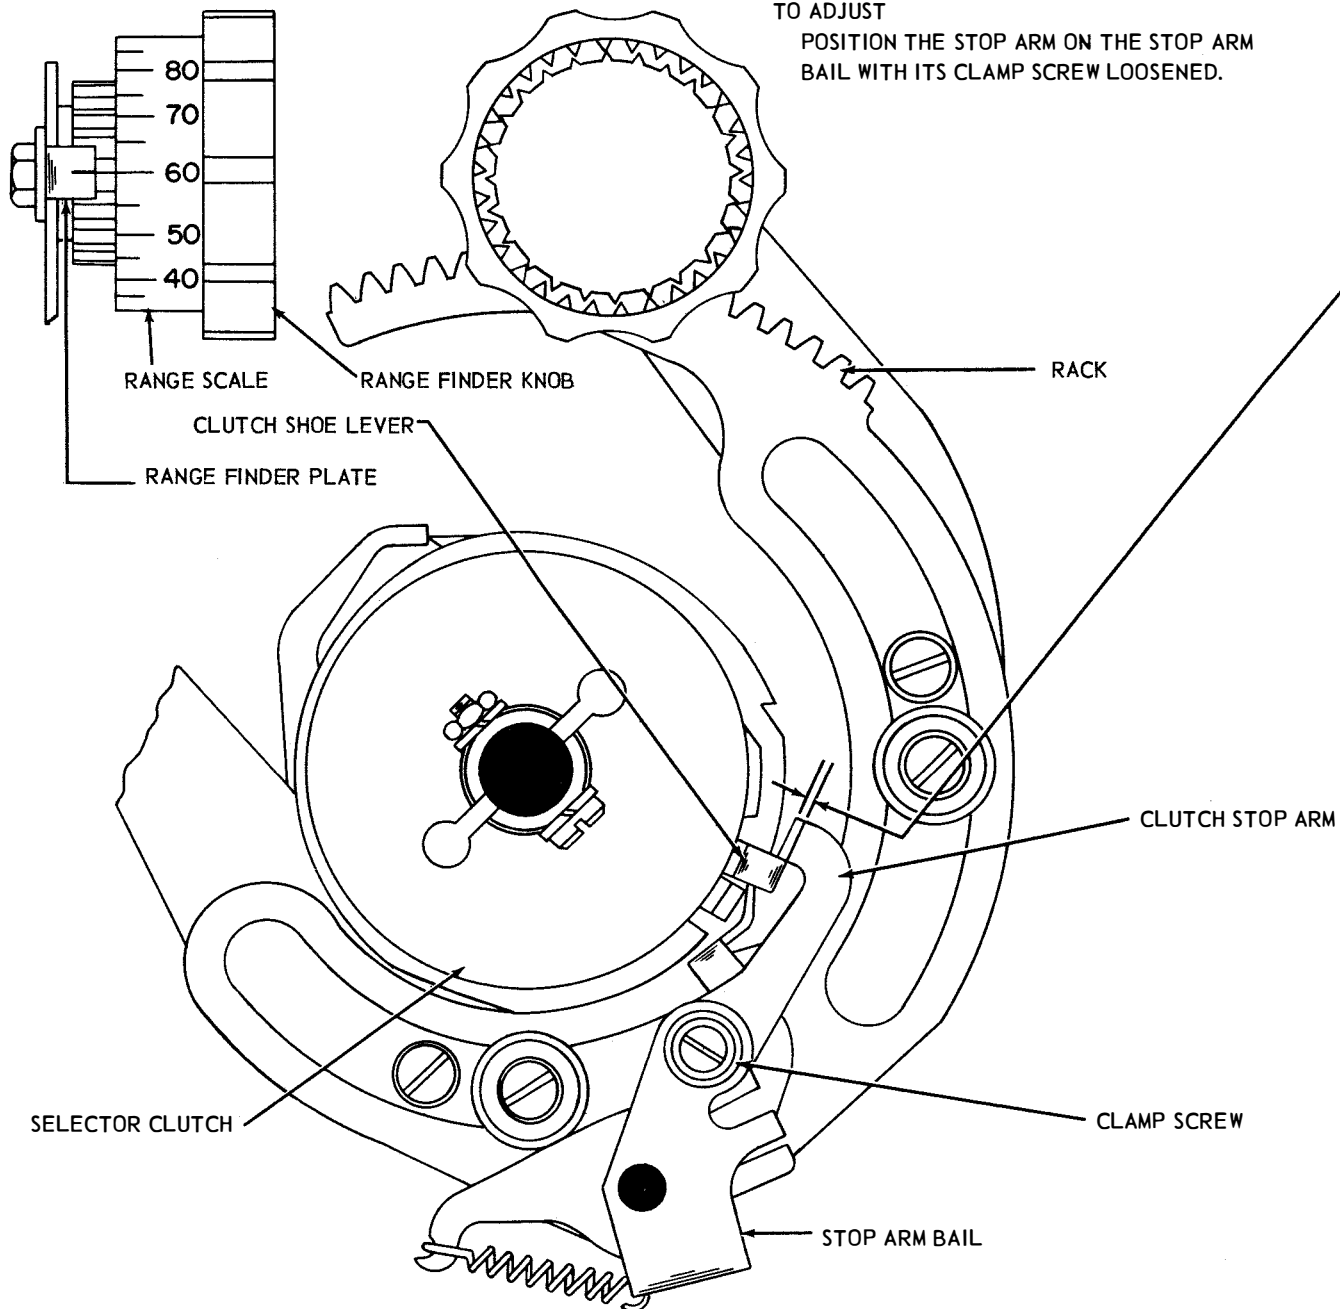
TYPYR RANGE FINDER MECHANISM. RIGHT SIDE VIEW
